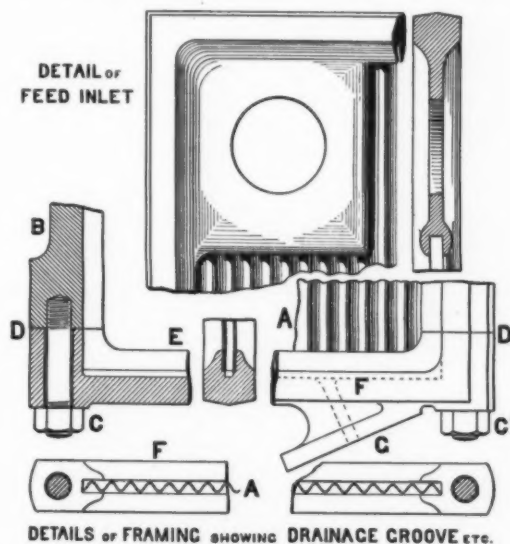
DETAILS OF PLATE CONSTRUCTION
